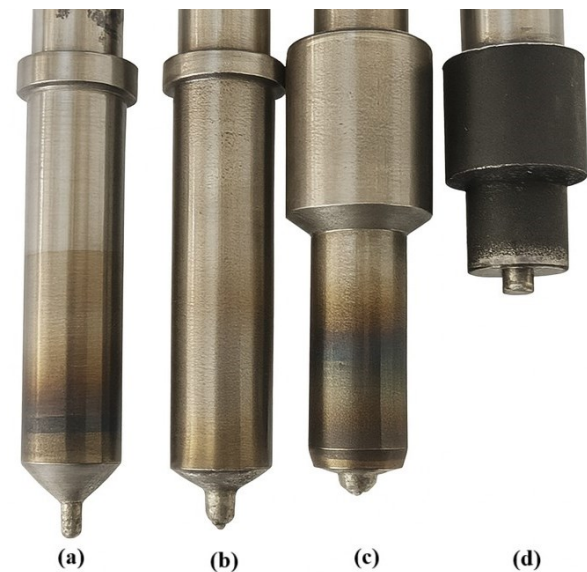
Photographs of the custom-designed FSW tools used for different joint angles: (a) 90°, (b) 150°, (c) 165°, and (d) 180°.
